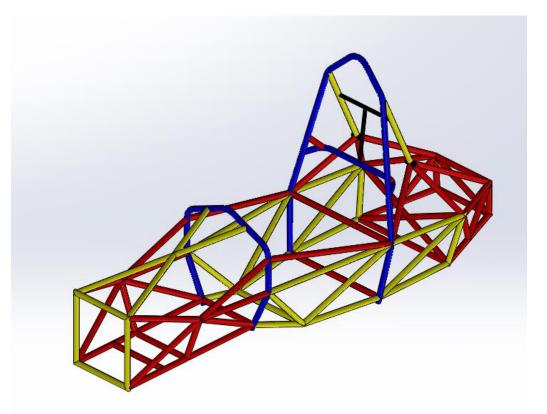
Isometric of the Completed Tube Model of Frame
